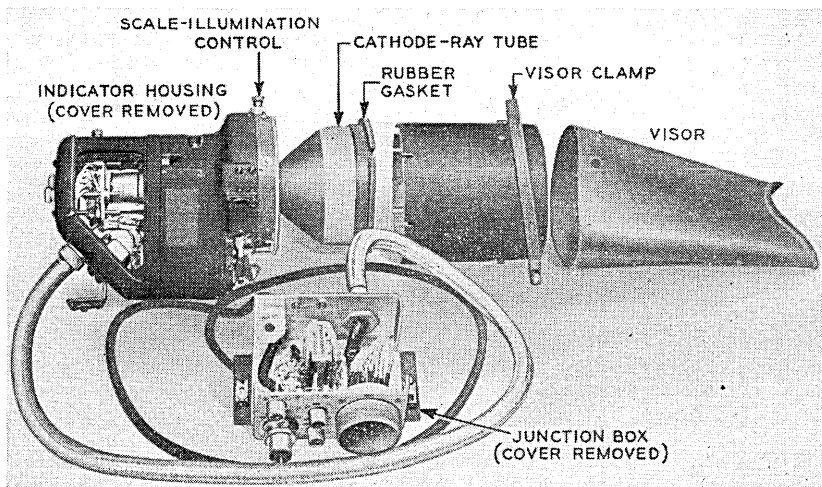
Indicator design for AN/APQ-13 radar bombing equipment.
